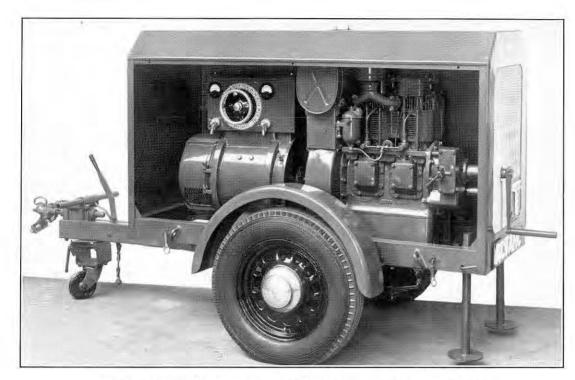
DIESEL WELDING SET; ARC MANUFACTURING COMPANY, LIMITED.
